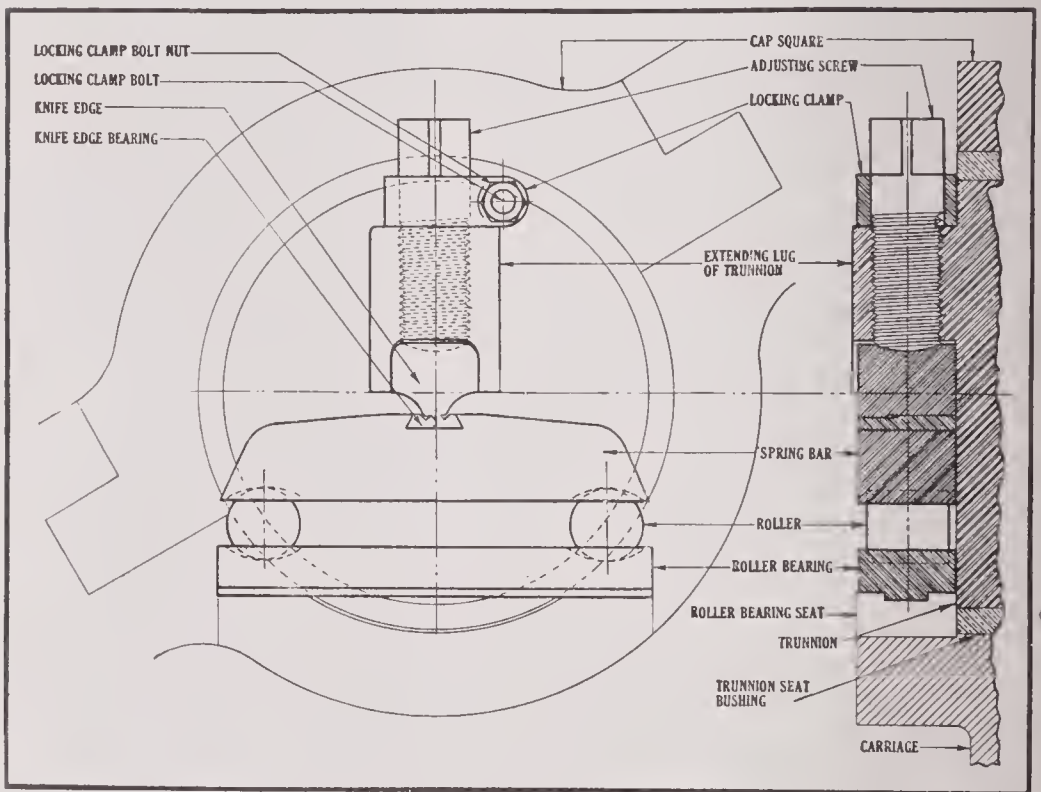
DETAILS OF FRICTIONLESS TRUNNION BEARING.
